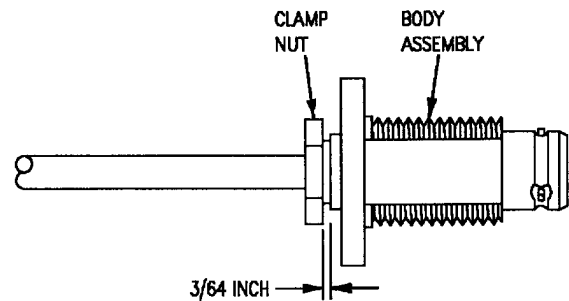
M25516/19-04-14 Coax Connector Repair (Sheet 2)
